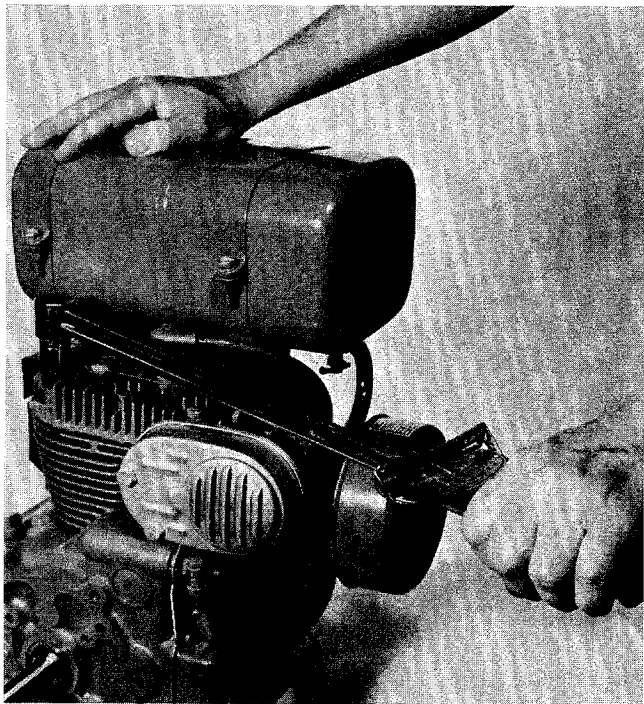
/38) 6 HP Tecumseh engine head bolt tightening sequence.)
